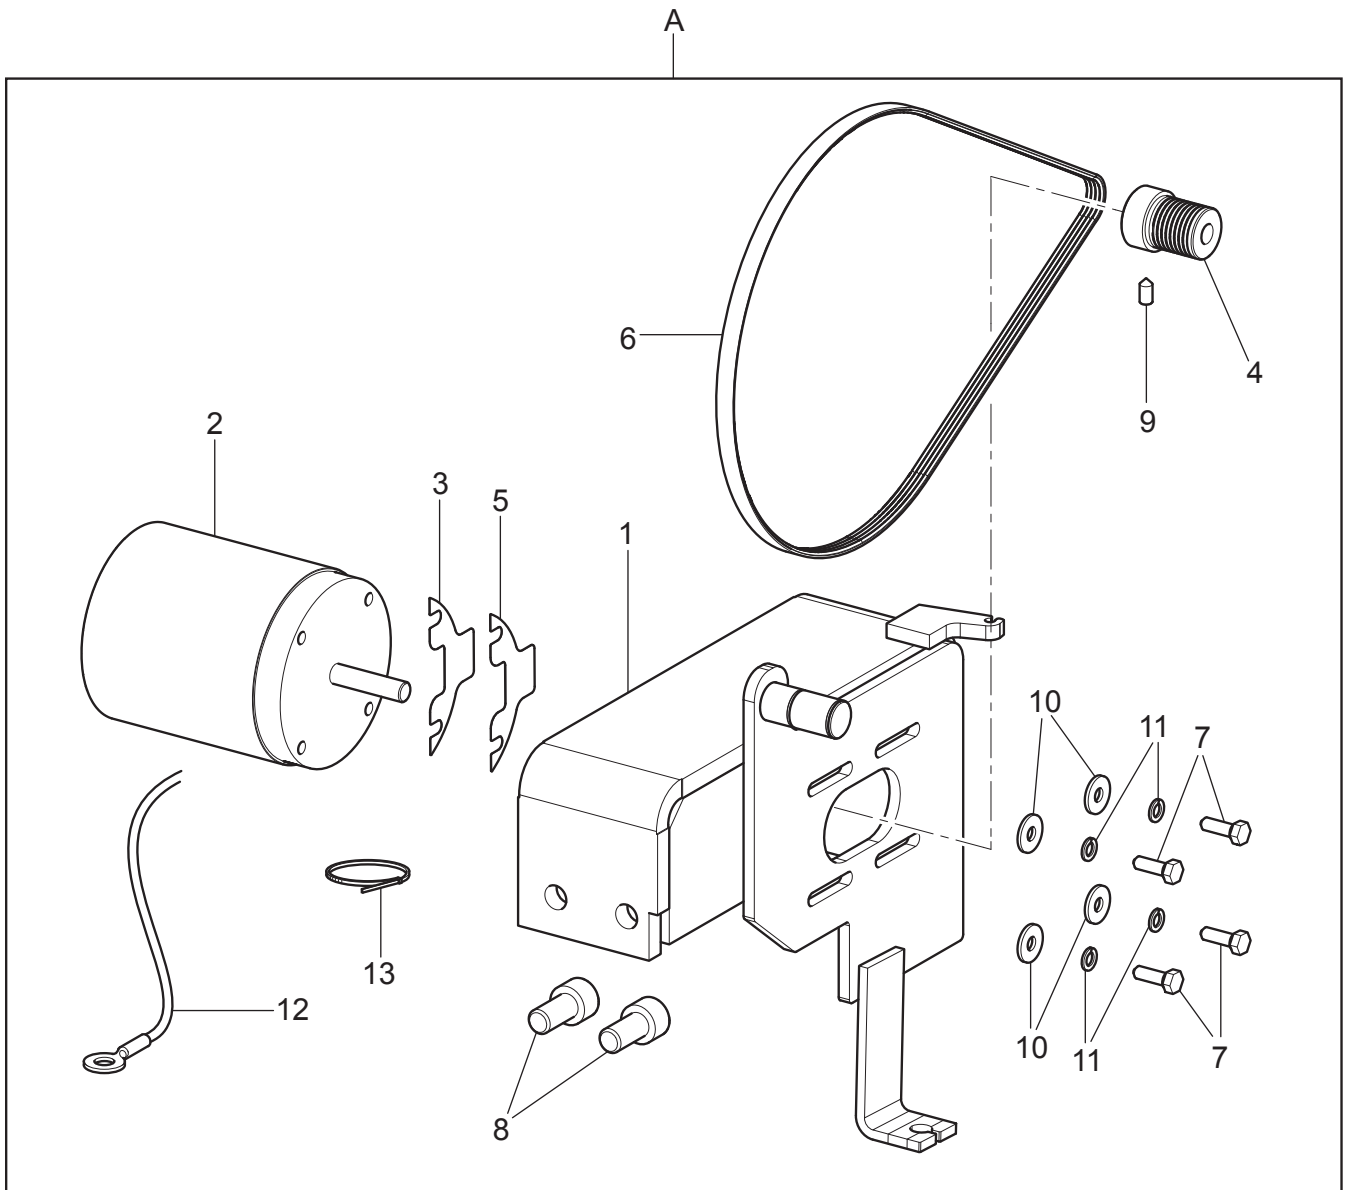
Rev. 1			VS129795890			→	→
